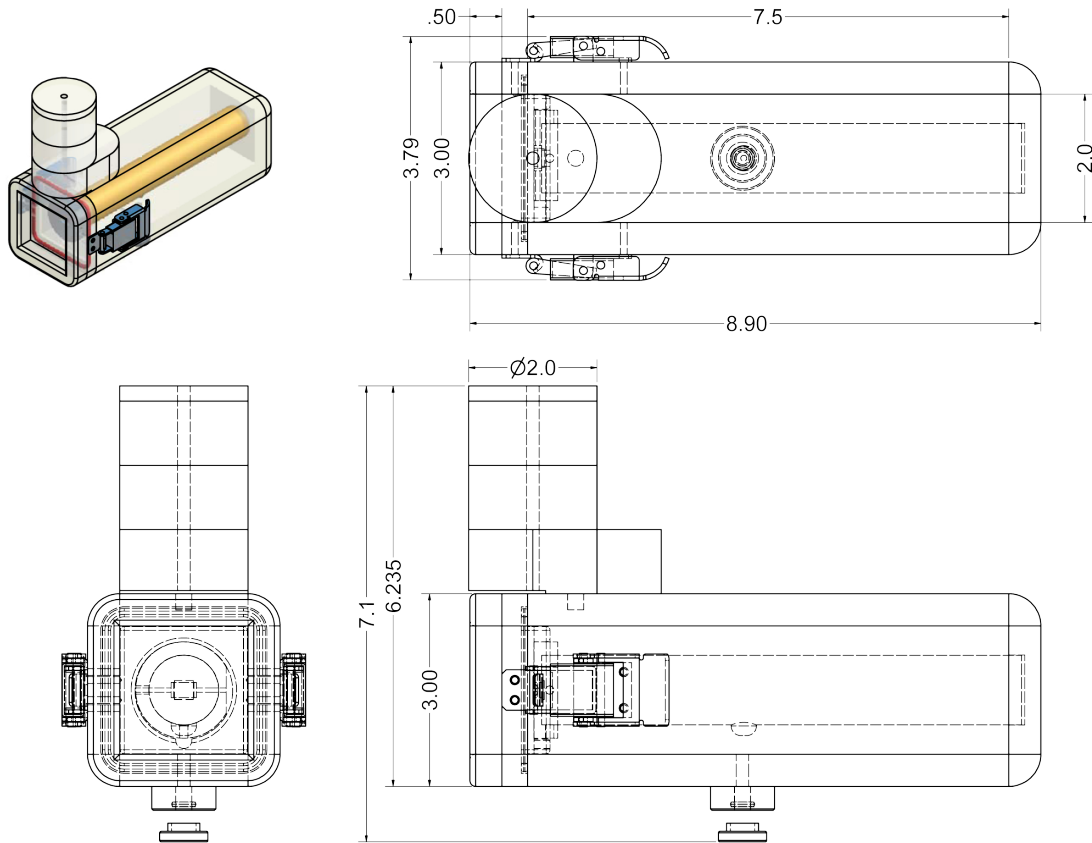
Dimensions of the underwater laser housing for the first-generation design of SCUVA. Dimensions are shown in inches. Drawings are courtesy of Ken Sexton (Sexton Photographics).
